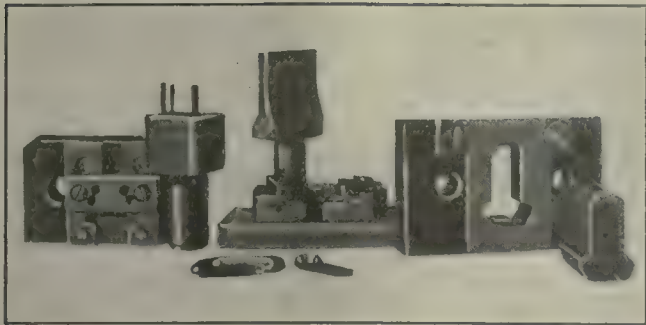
METAL STAMPING TOOLS AND THE FINISHED PRODUCT
